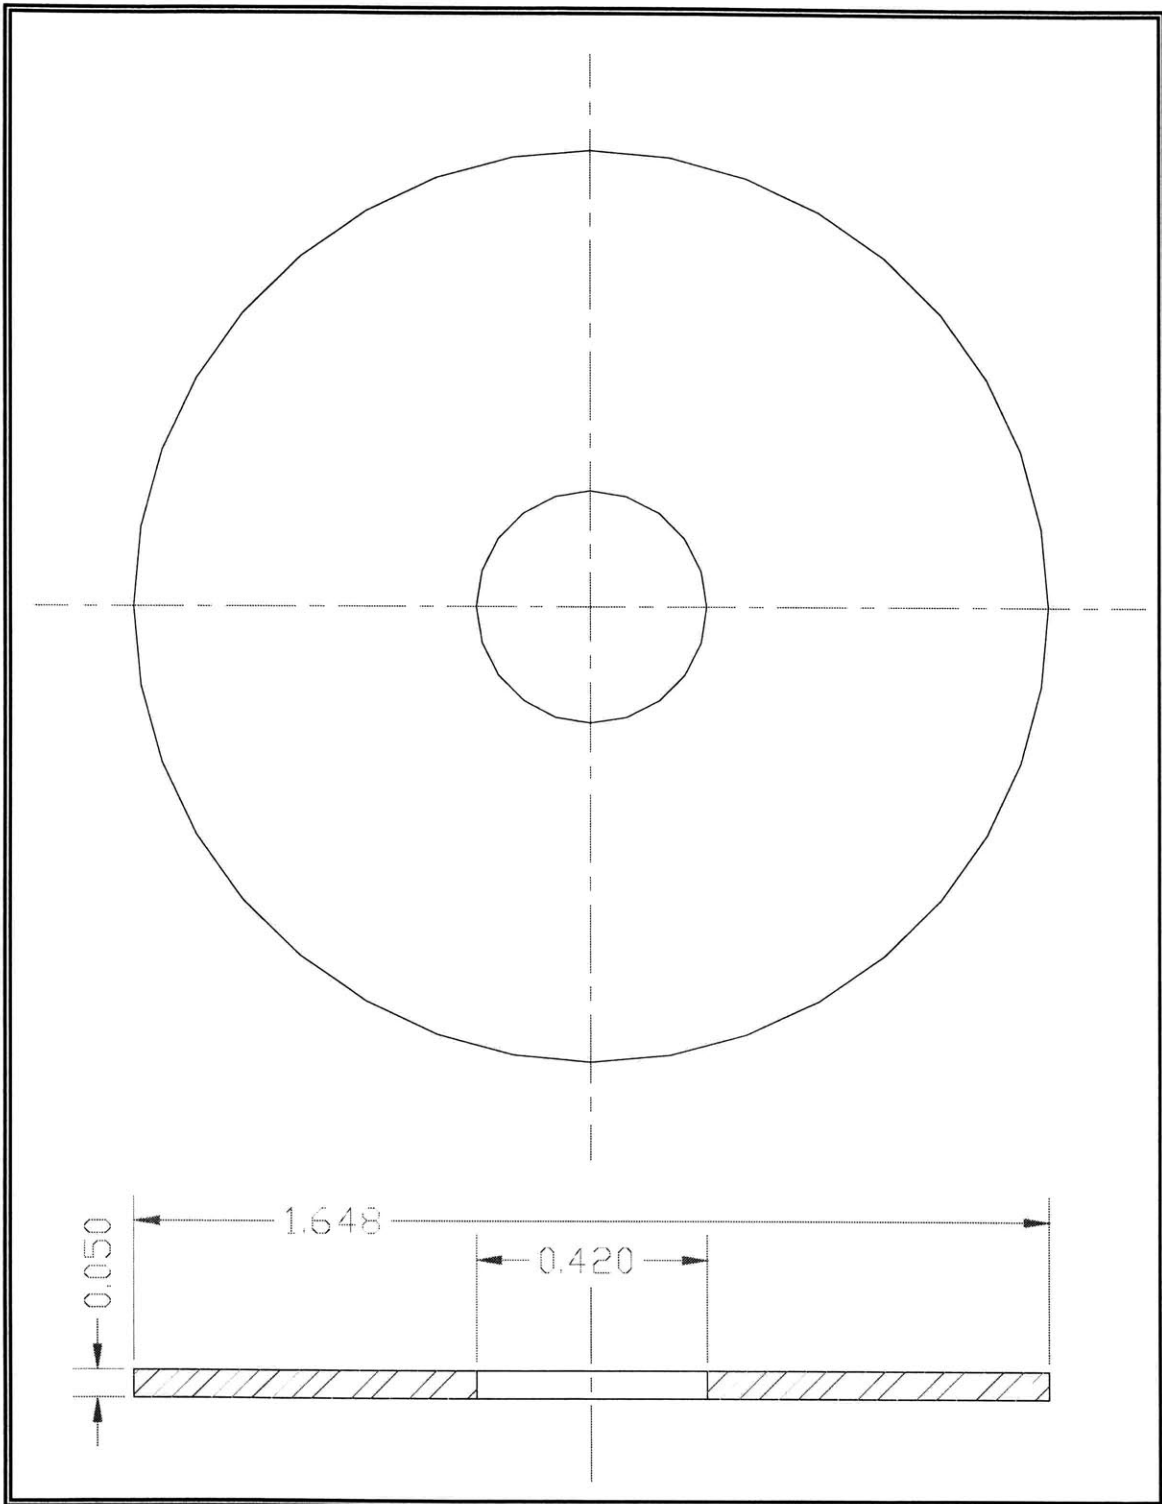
The inlet valve disk checks high-pressure flow into the expander and its inner and outer diameters are similar to those of the assembled inlet valve yoke
